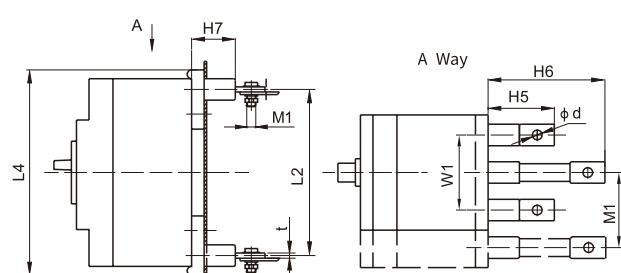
RDM1E-400, 630, 800 Fixed type rear wiring
